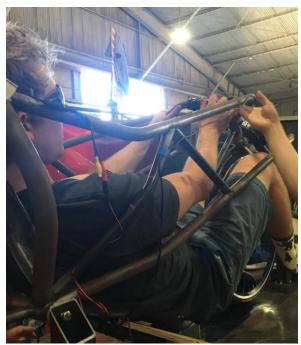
Third test fit with Josh, checking clearance on the shoulder truss members, with steering system and handlebars assembled.
